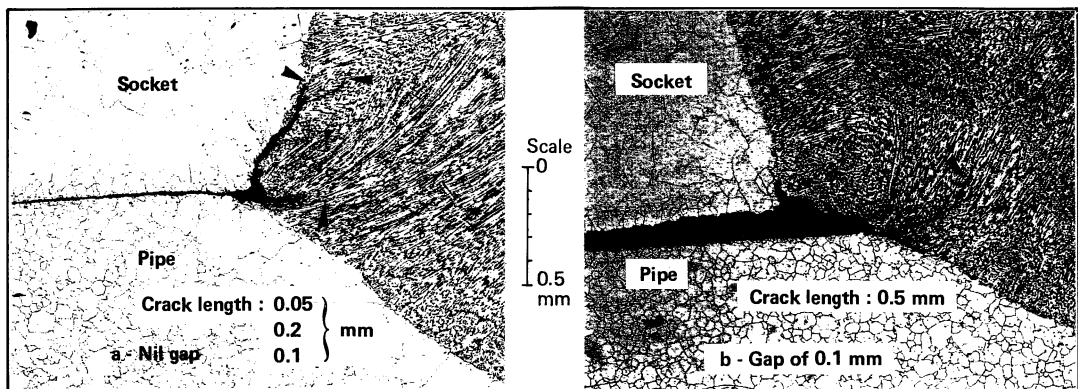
Two examples of cracks observed in the socket weld.
